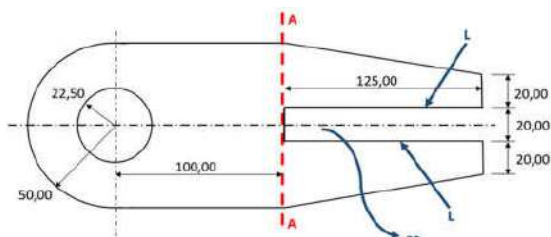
Sketch of an eyebar for connecting the spring plate to the toothed crown pin. Each spring plate has two such eyebars, fillet welded along 'L' to the spring plate ('SP') that fits into the 20mm thick slot represented. The fracture of these auxiliary plates occurred always along the path schematically indicated by the interrupted line 'AA'.
